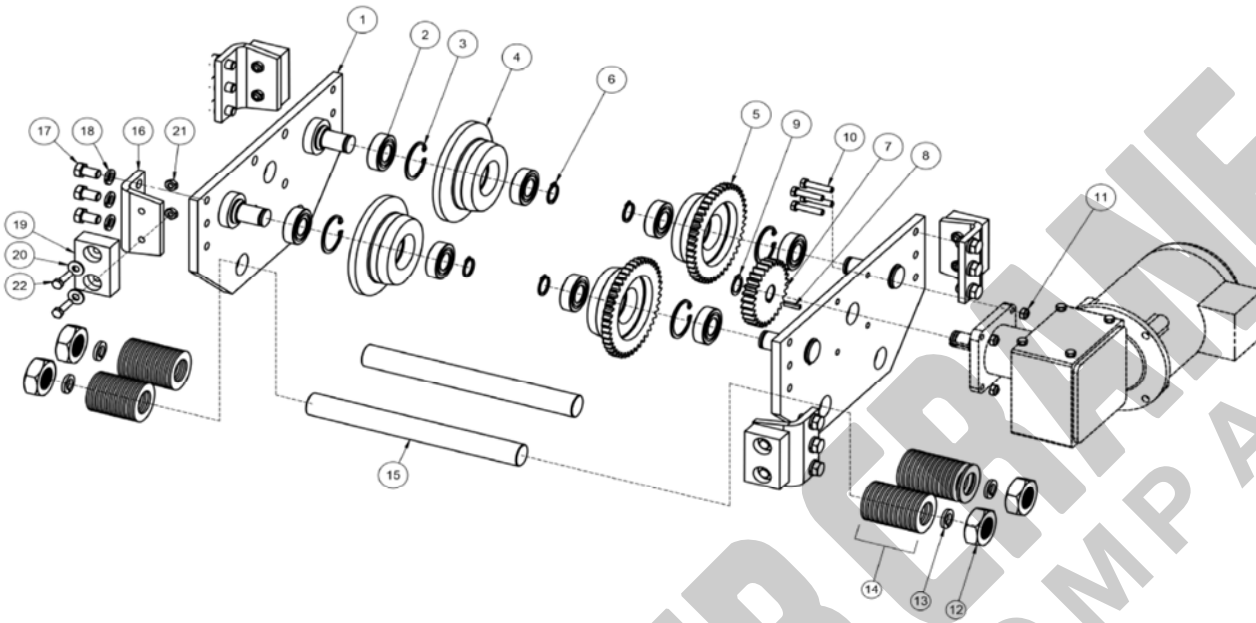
Trolley Frame and Wheel Assembly One Motor 8" Wheels
